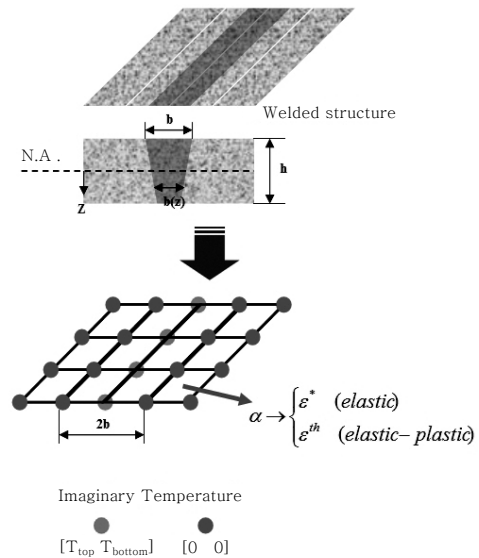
A Section of welded joint and its idealization in SDB Method
